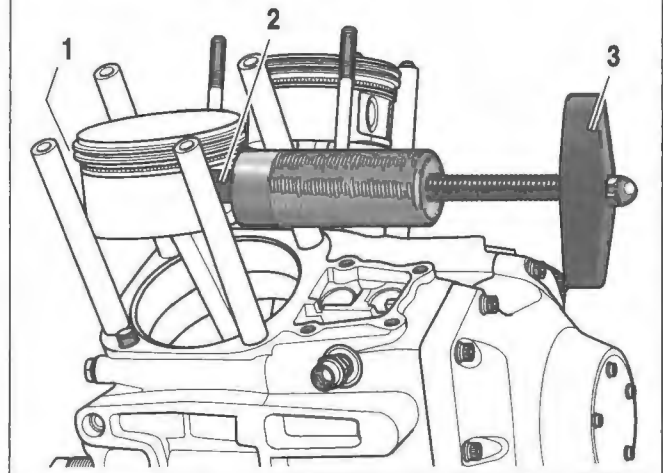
Piston Pin Remover (Part No. HD-42320-A)
